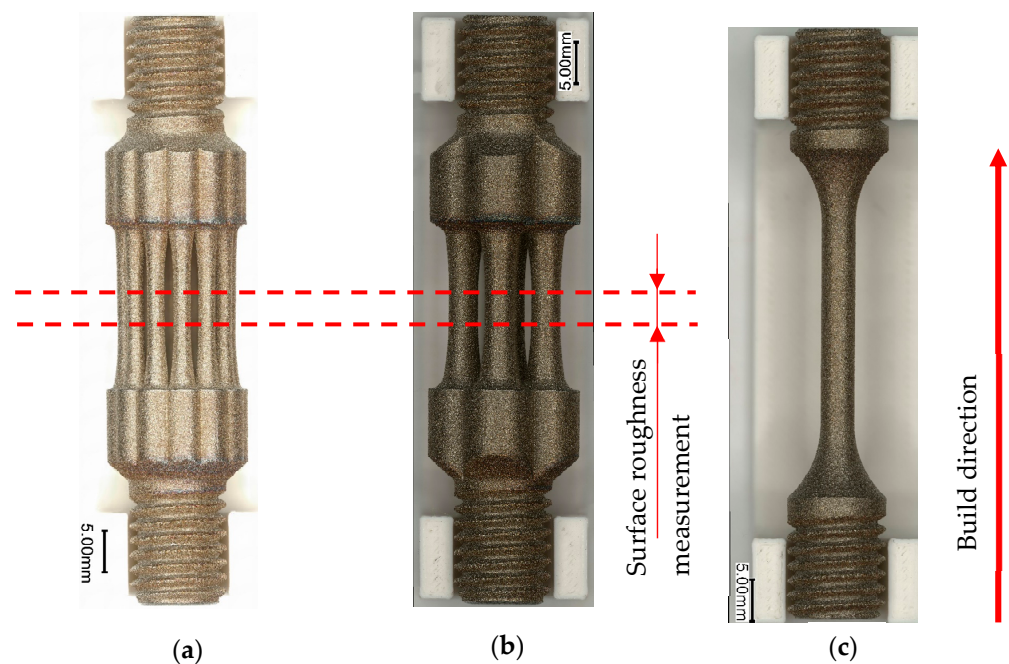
Manufactured specimens with (a) N12 specimen geometry (b) N4 specimen geometry (c) tensile specimen geometry.
